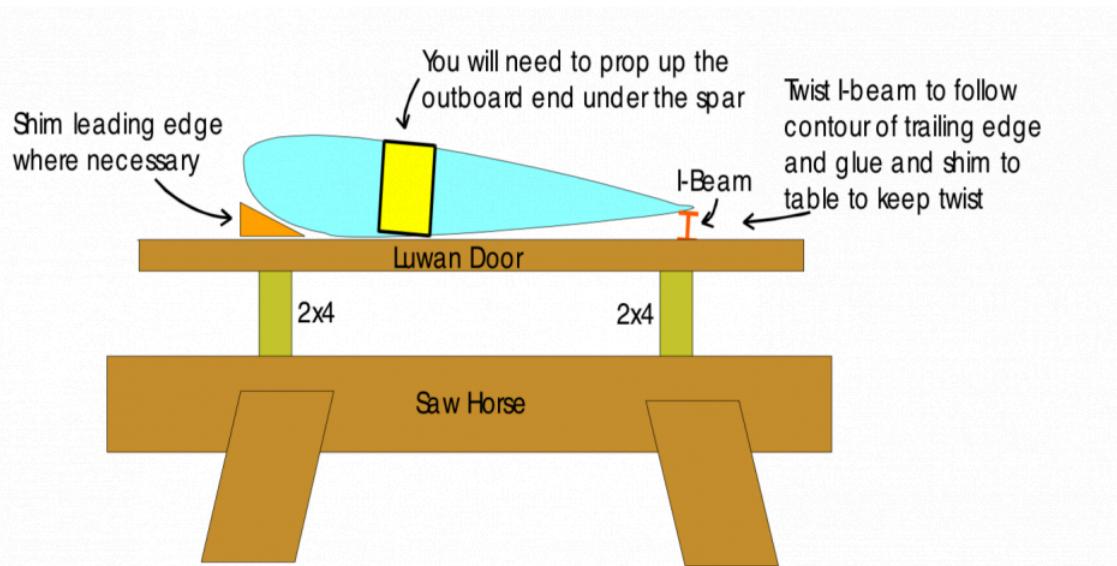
Supporting the Wing for Lower Skin Lay-Up
